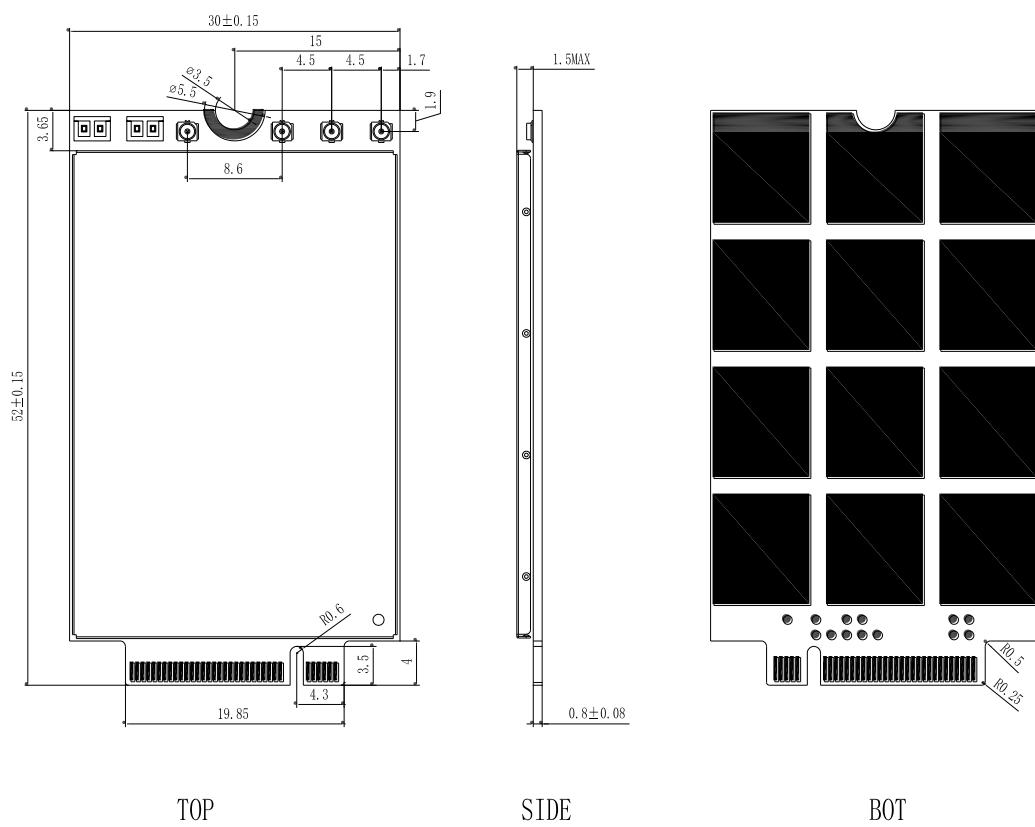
Mechanical Dimensions of the Module (Unit: mm)
